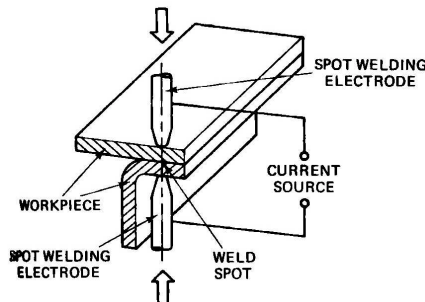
Direct spot welding of flange joints between two opposing electrodes (Cary, 1994).
